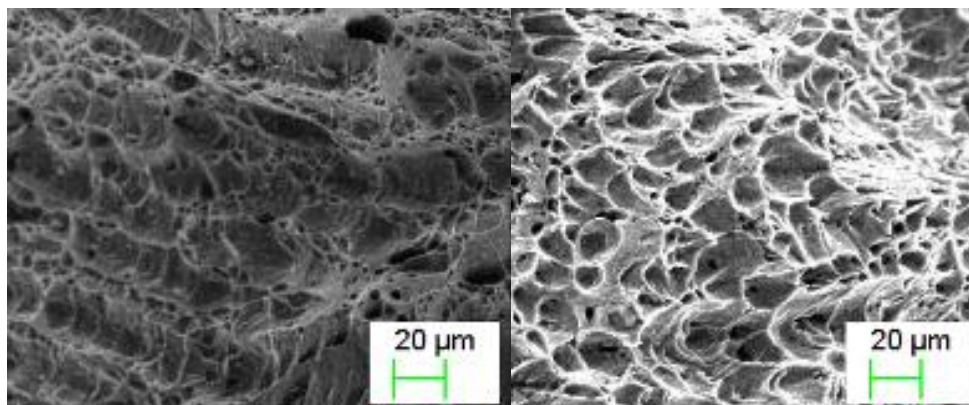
Charpy toughness test specimen fracture surface (a)A-TIG (b) A- TIG weld after PWHT (Vidyarthi, Dwivedi, & Vasudevan, 2017)
